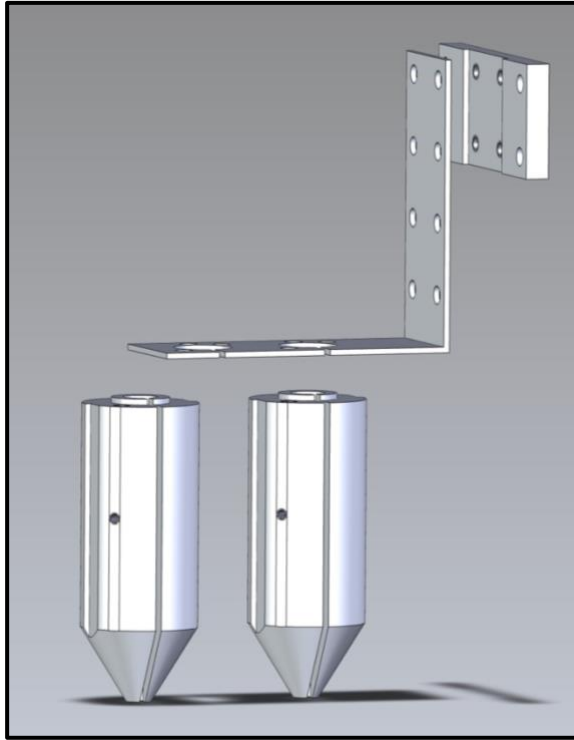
Exploded ‘Solidworks’ assembly of the reservoir’s encasing thermal jacket and relevant connecting fittings.
